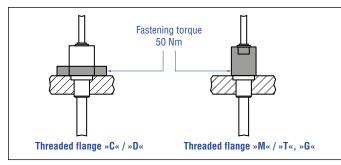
Mounting example of threaded flange »C / D«, »M / T« & »G«
